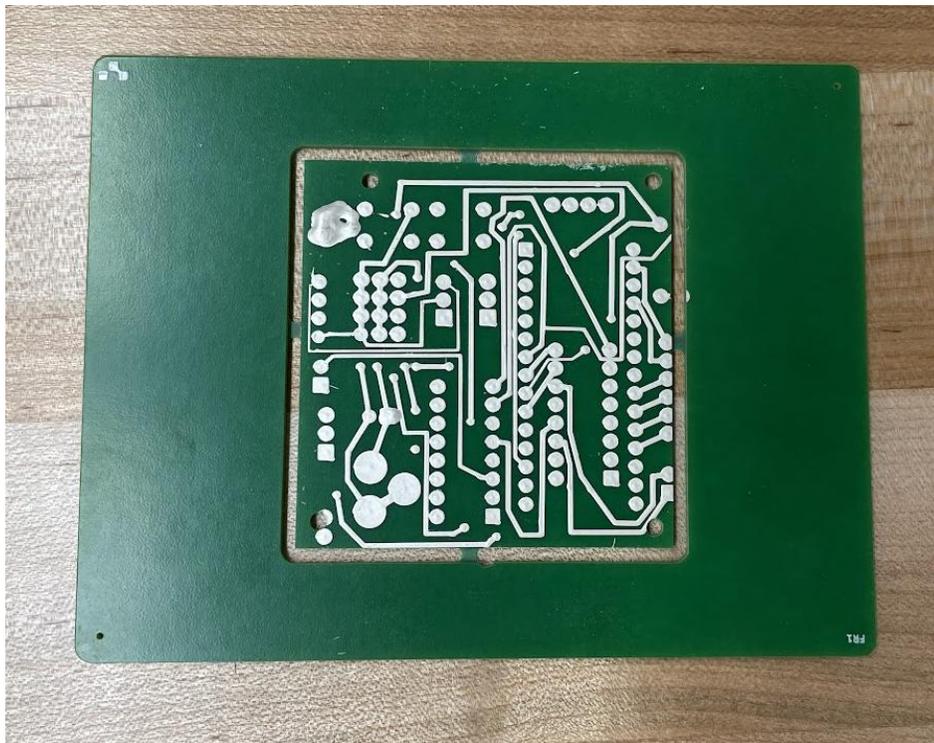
PCB after CNC routing, some conductive ink on the right side was cut through
